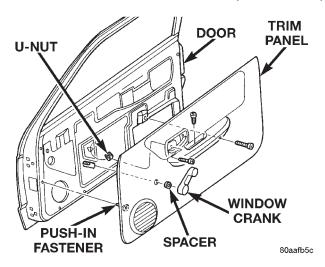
Front Door Trim Panel Remove/Install - Manual Window
